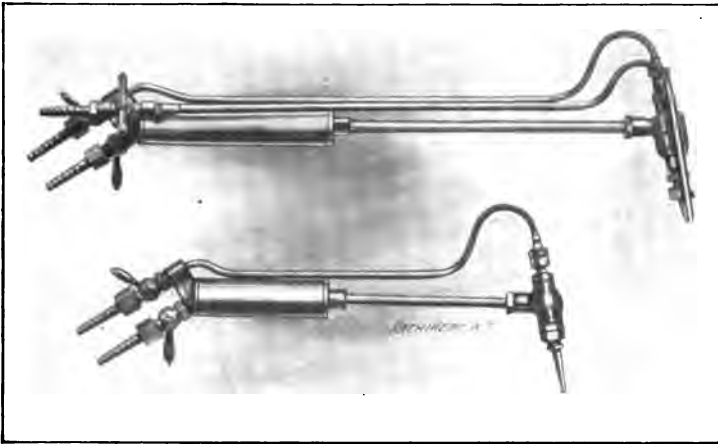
Davis-Bournonville Oxy-acetylene Cutting and Welding Torch
